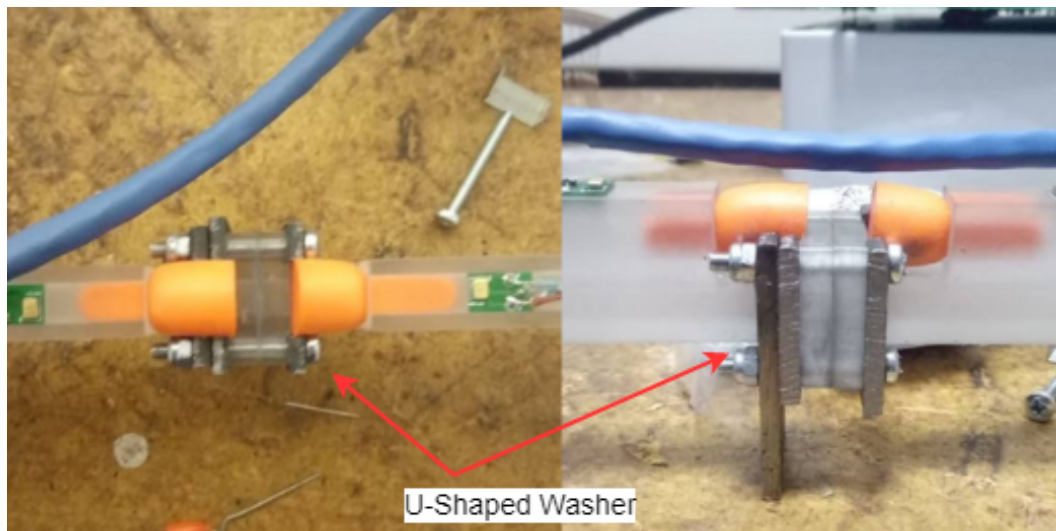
Actual flange assembly. Left: Top down view, Right: Profile view. The mild steel U-shape washers have been labelled.
